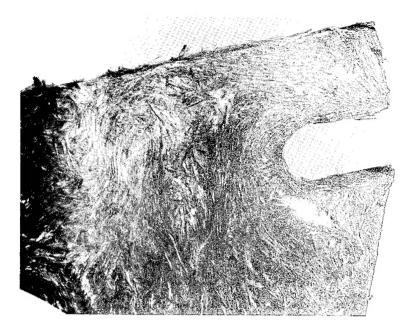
Crankshaft rear seal housing showing fiber orientation around molded-in fixing slot
